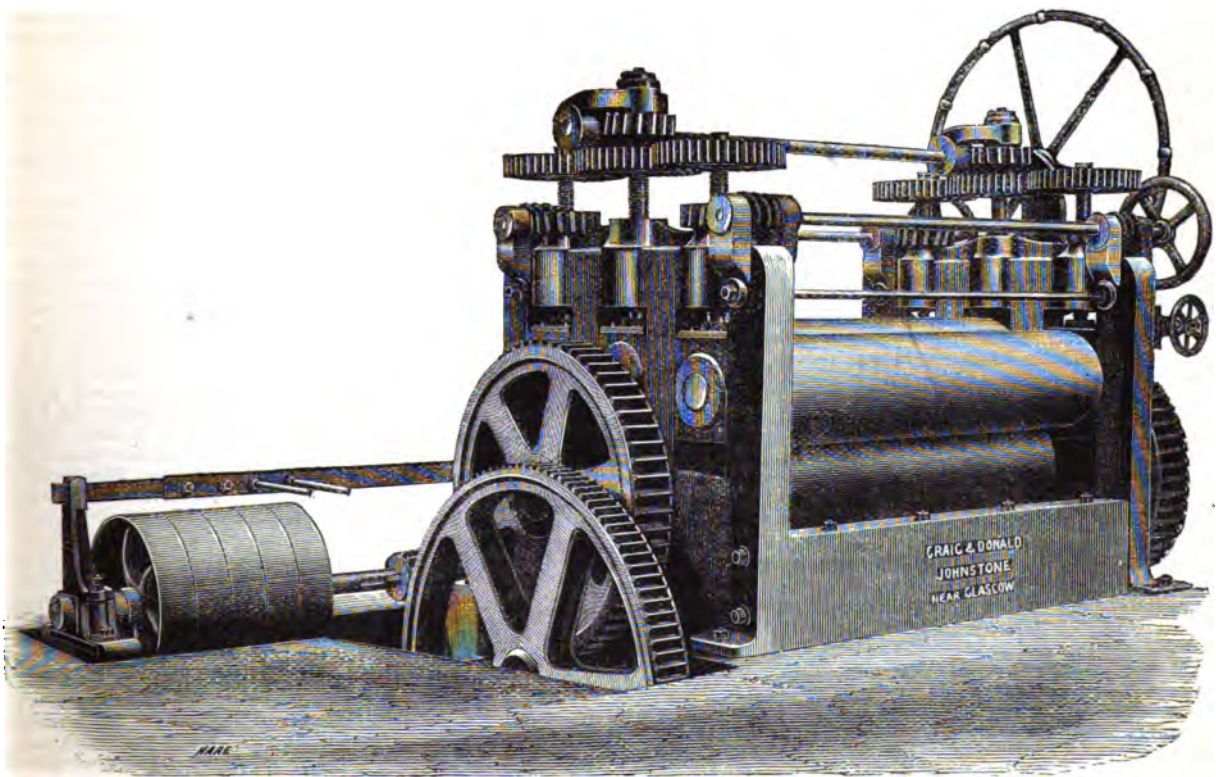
CRAIG & DONALD'S PLATE BENDING MACHINE. (For Description see page 229.)
